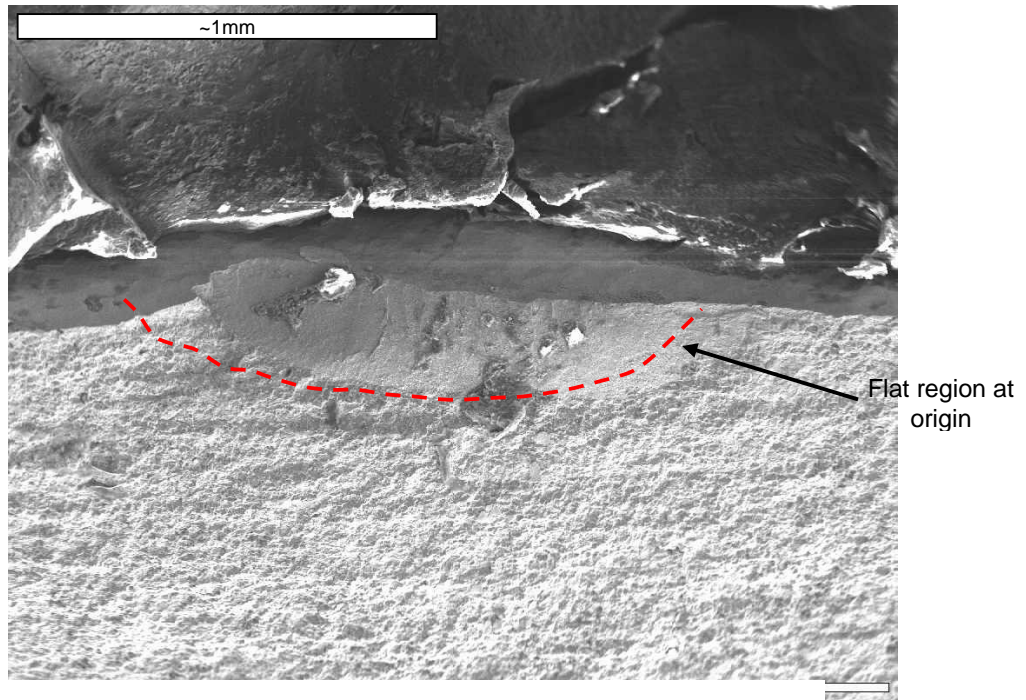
Fracture surface at fatigue crack origin after cleaning.
